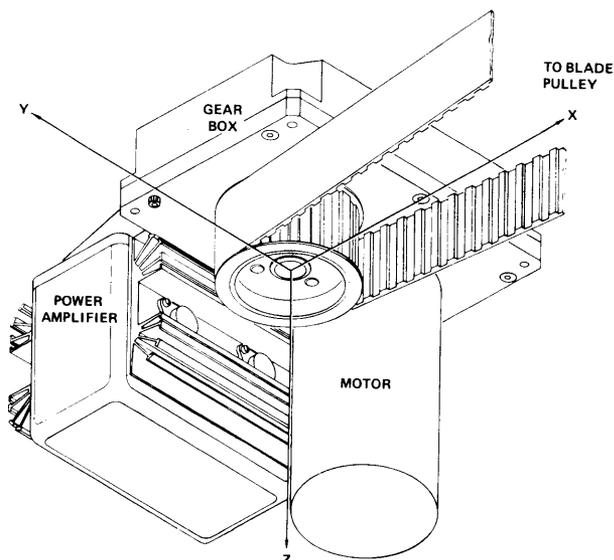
BLADE ACTUATOR ASSEMBLY
